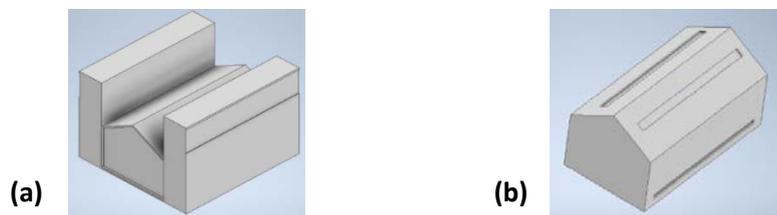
Tunnel (a) and triangular (b) type greenhouse.
